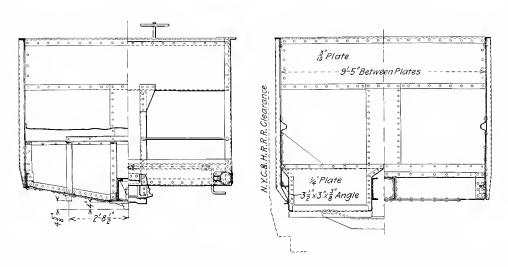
Cross Sections and End Elevation of All-Steel 40-Ton Capacity Hopper Coke Car Shown in Figs. 28 and 296.
